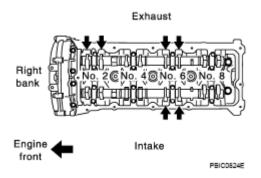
Identifying Valve Clearances Checking Locations At No.6 Cylinder
